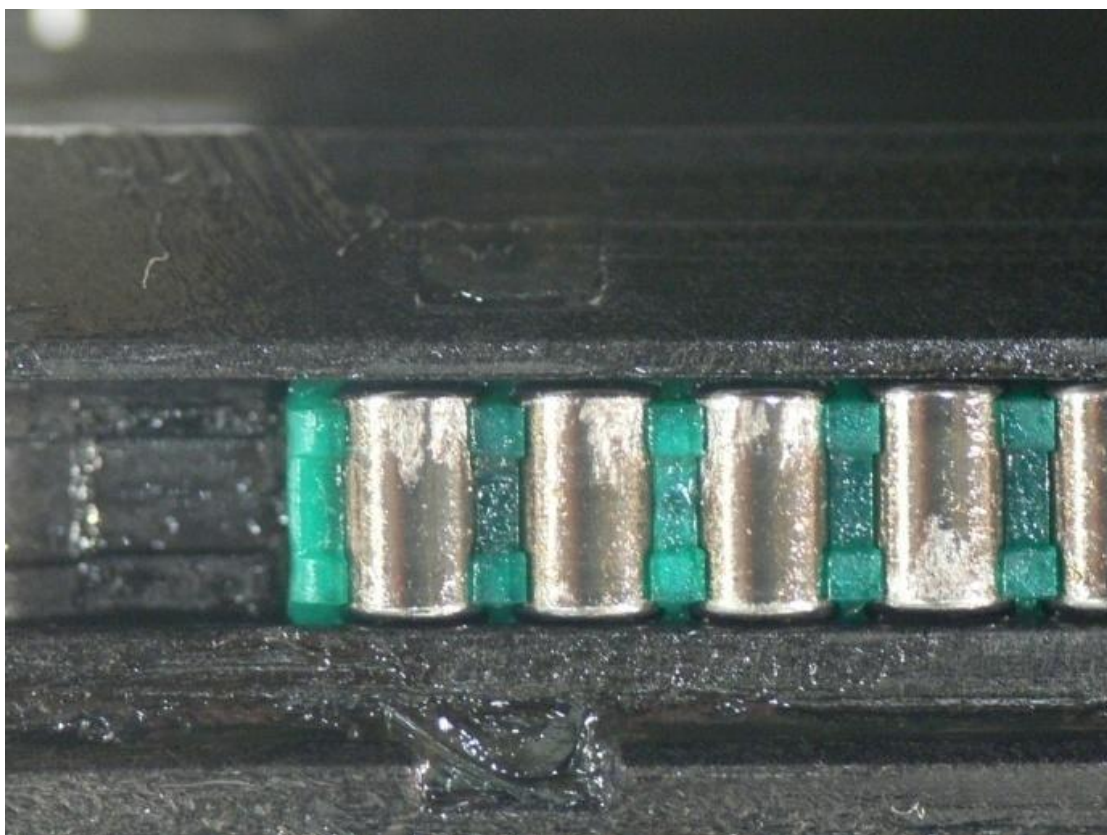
Spalling of roller (2958 km 11 kN)
